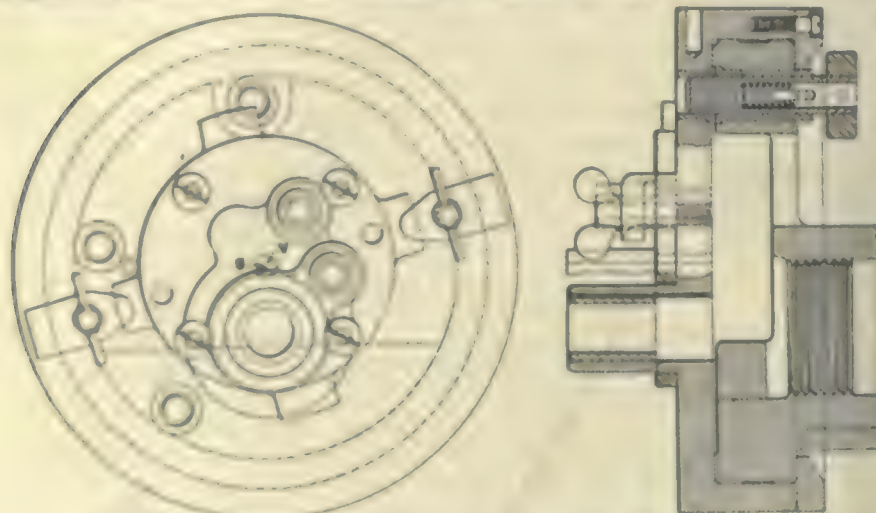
DETAILS OF FIXTURE FOR BORING GEAR CASES
